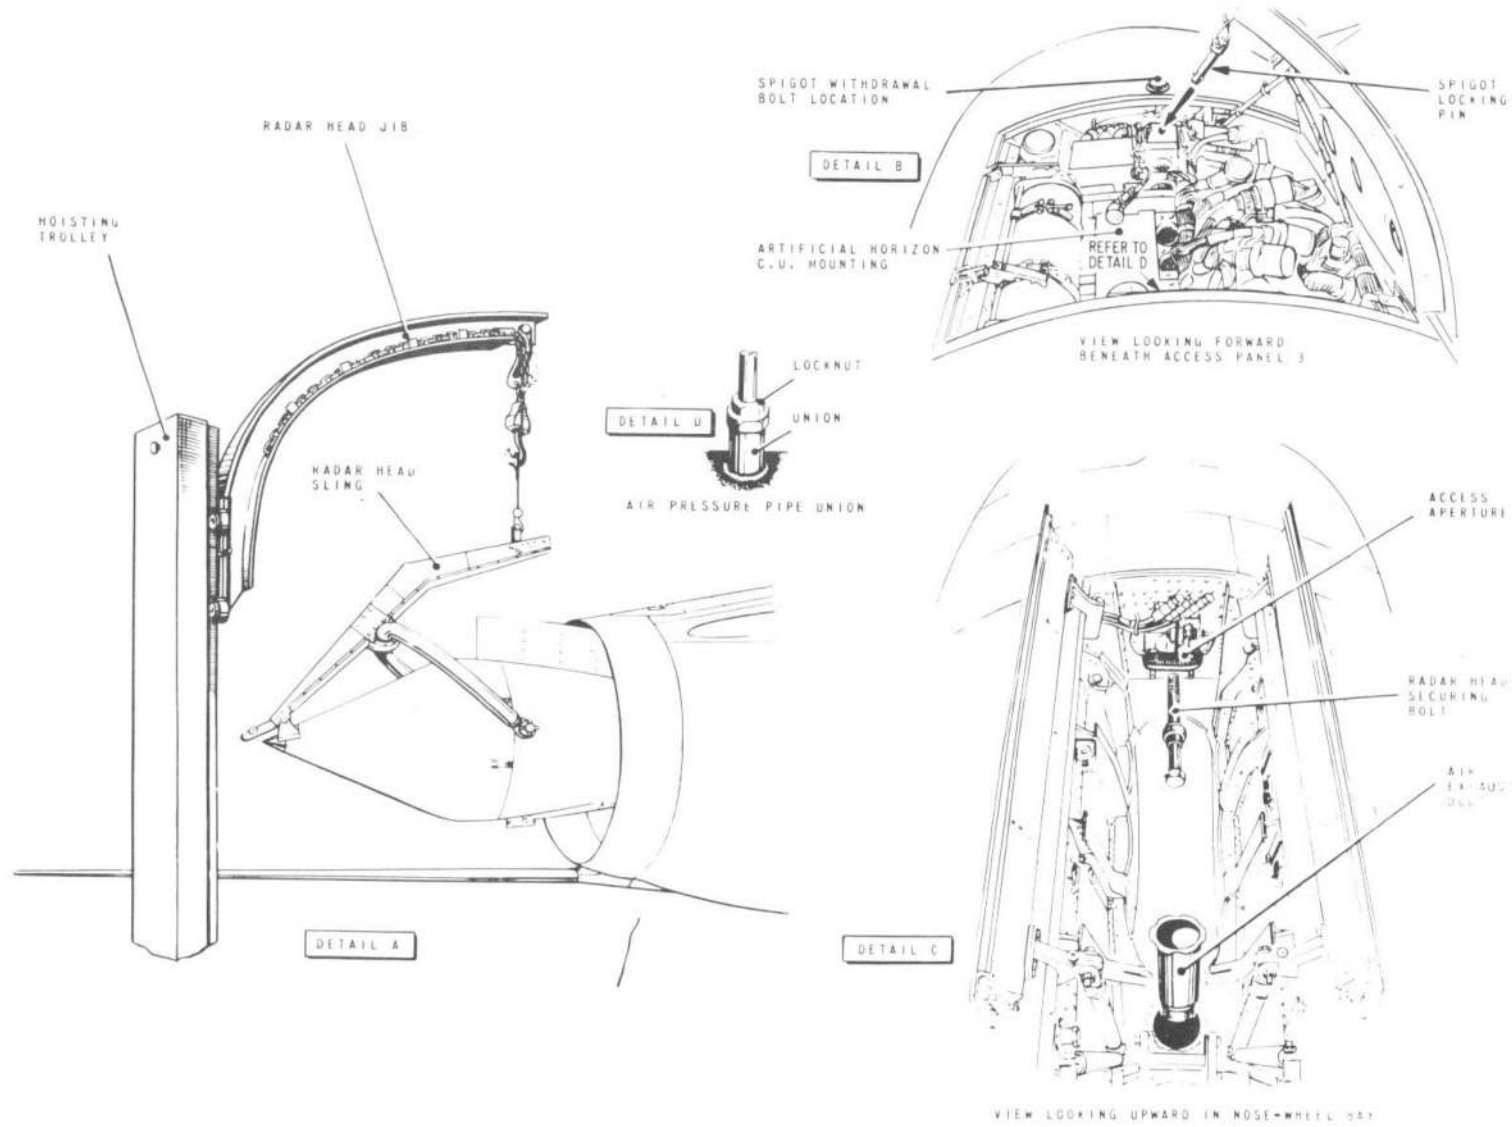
RADAR HEAD REMOVAL AND ASSEMBLY
